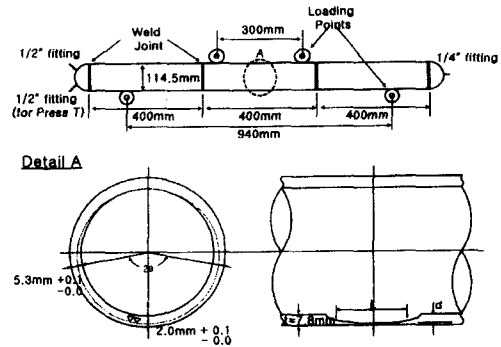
Geometry of pipe specimen and local wall thinning shape
